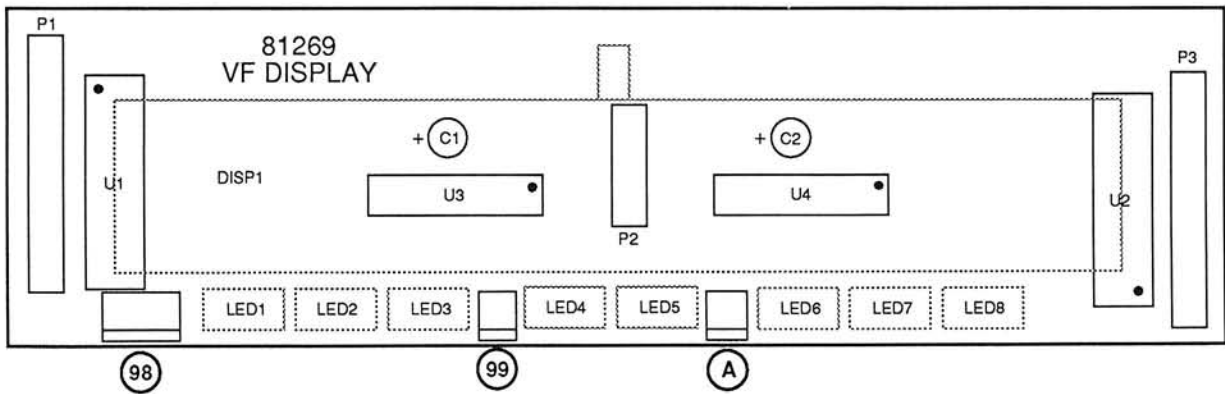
81269 VF DISPLAY BOARD COMPONENT LAYOUT
